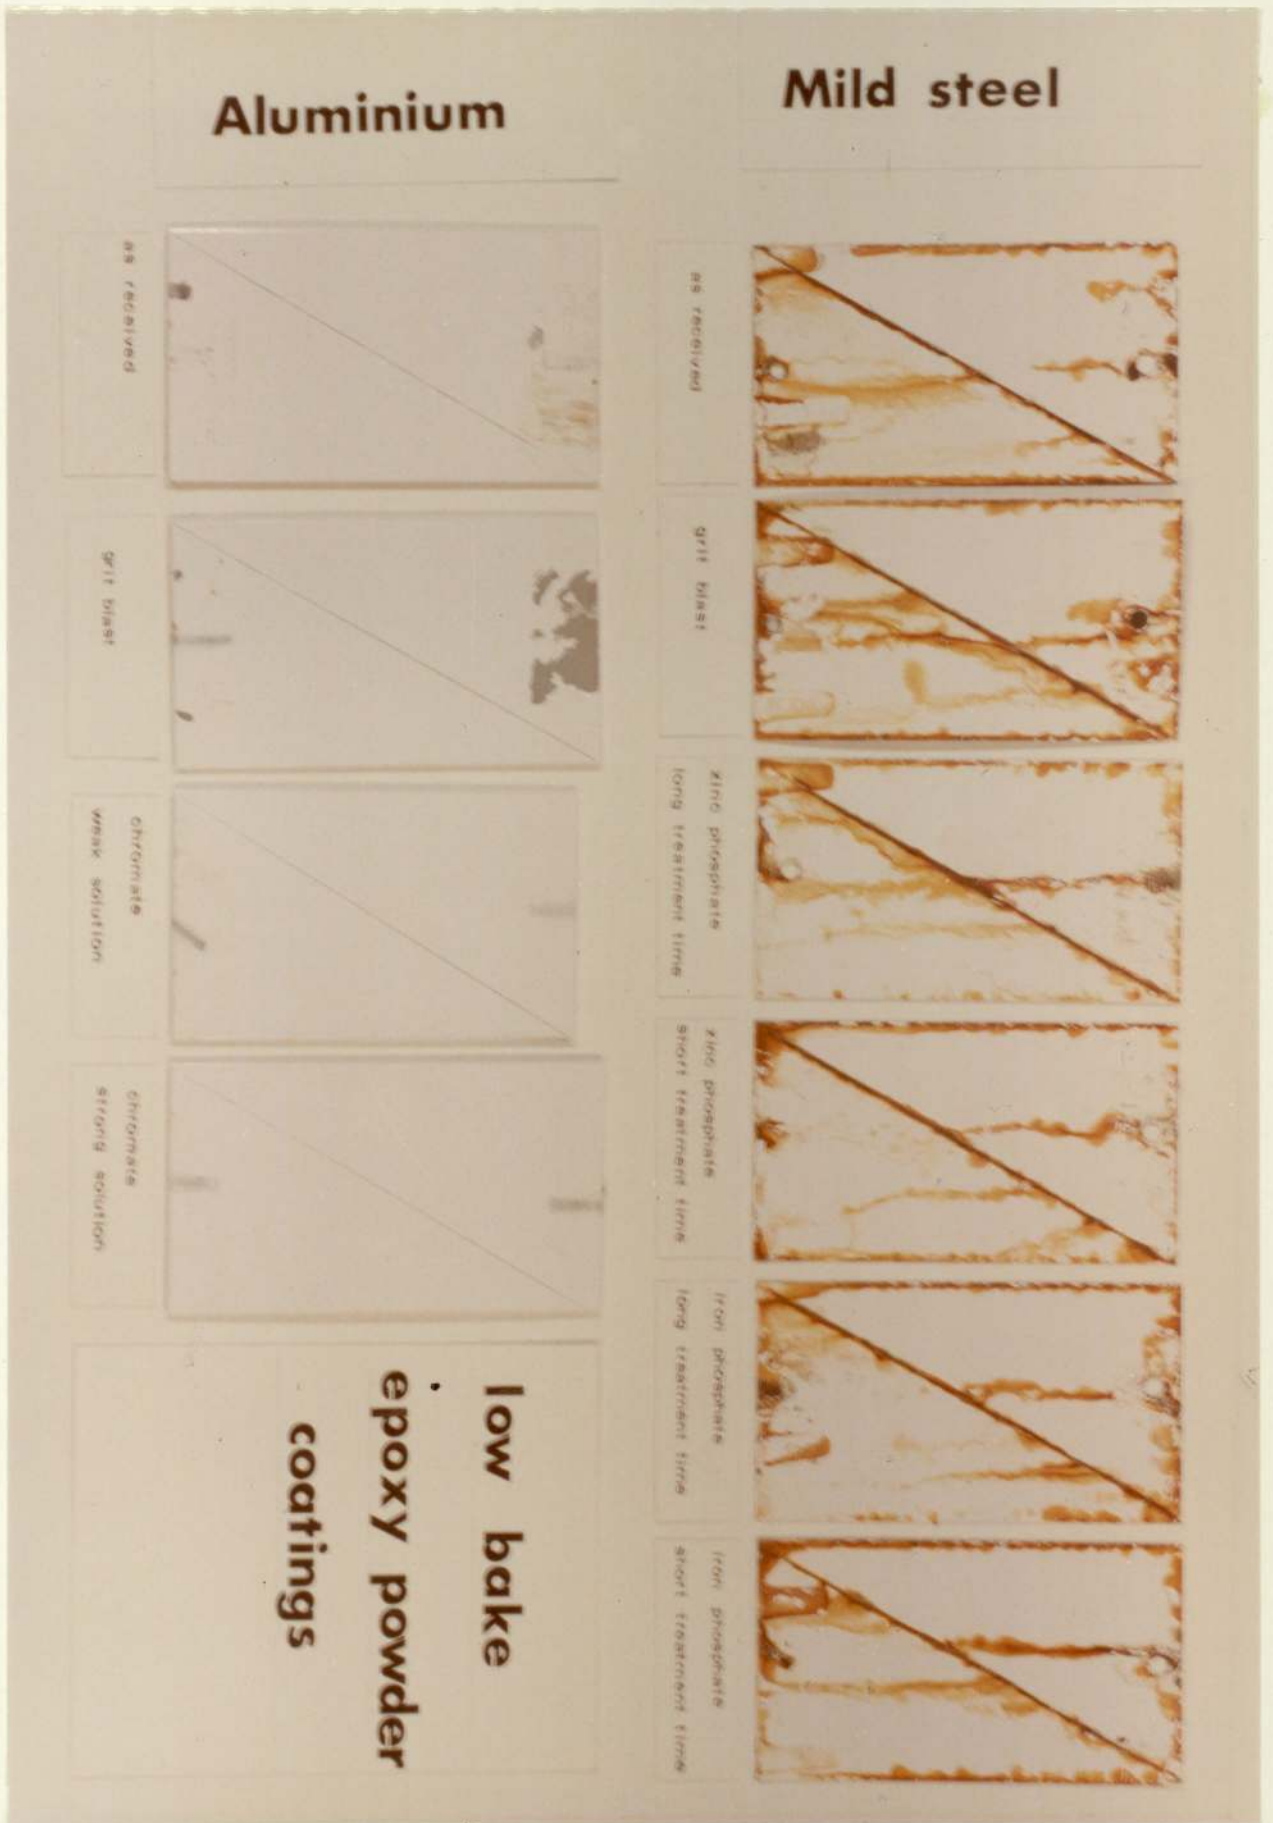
Corrosion panels after exposure to salt spray fog testing.
